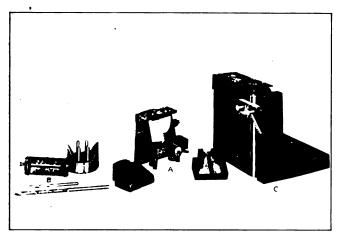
Two Jigs and a Fixture used in the Construction of the Block
